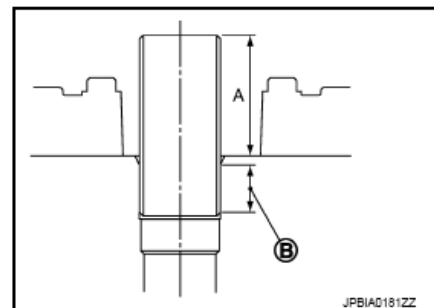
Identifying Spark Plug Tube Height And Sealant Application Area
